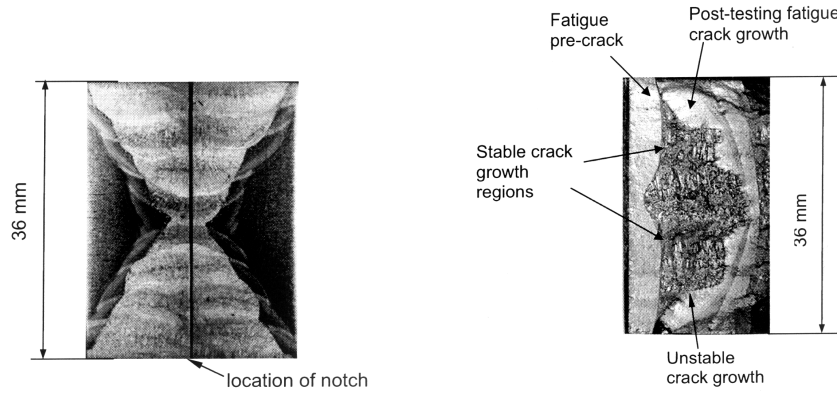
Macro-etched photograph of specimen Bx2B, Fig. 5. Fracture surface of specimen Bx2B with crack tip in the weld metal centre
